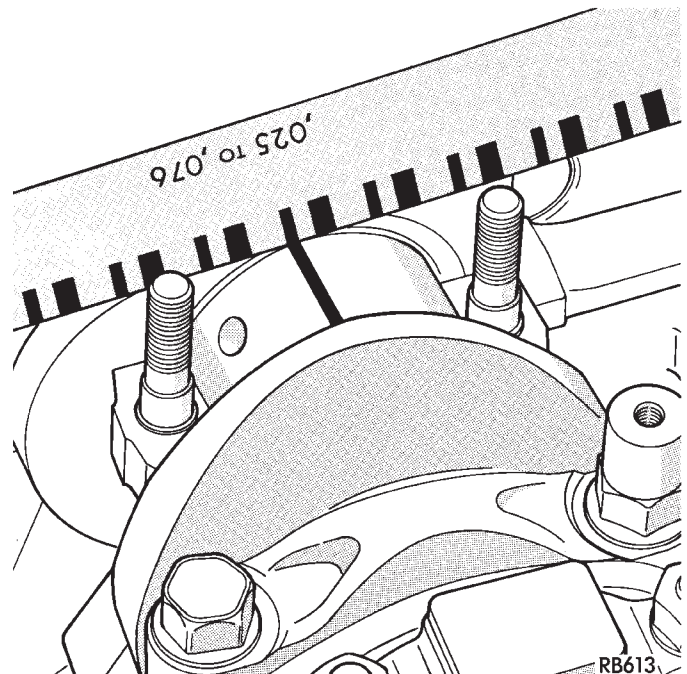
Checking Connecting Rod Bearing Clearance—Typical
